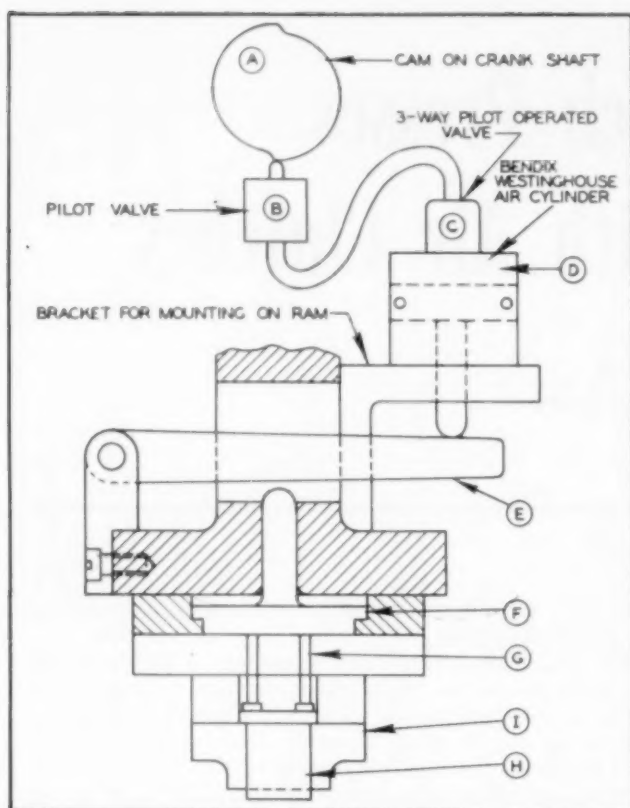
In this arrangement pressure is available on the work to hold it flat while operation is being performed, yet blank can be retained in die while rising to top of stroke.
